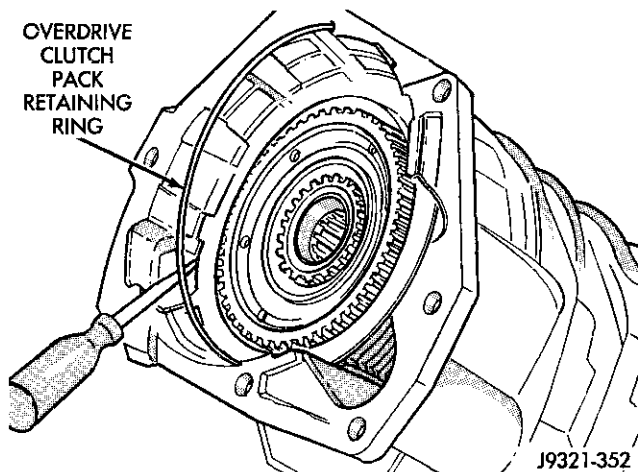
Overdrive Clutch Pack Retaining Ring Installation
